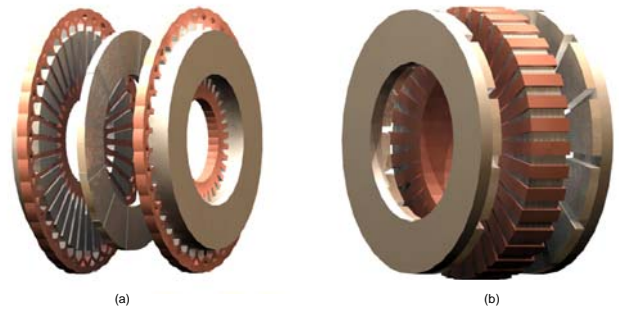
(a) Internal rotor Axial Flux machine (b) Torus Axial Flux machine.
